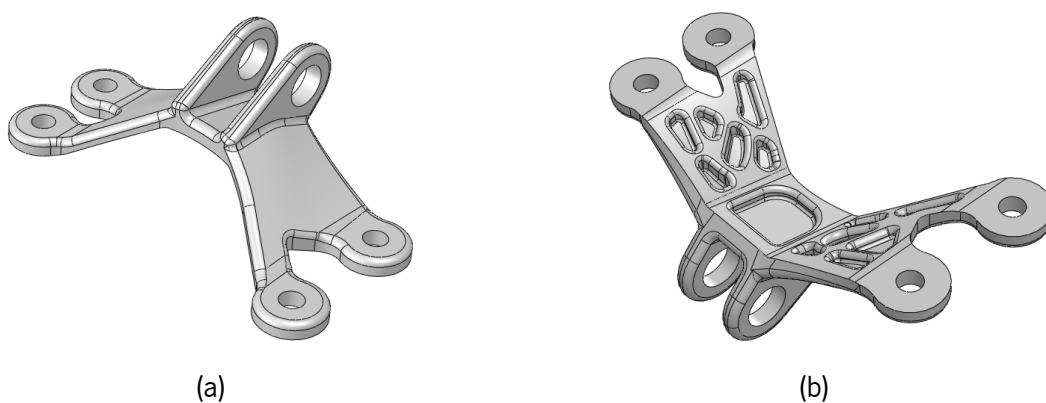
A top (a) and bottom (b) view of the CAD from the adjusted bracket for compression moulding
